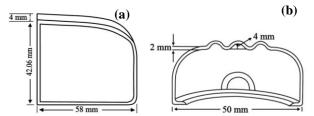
Dimensions of steel toe caps: (a) Side view, (b) Rear view.
